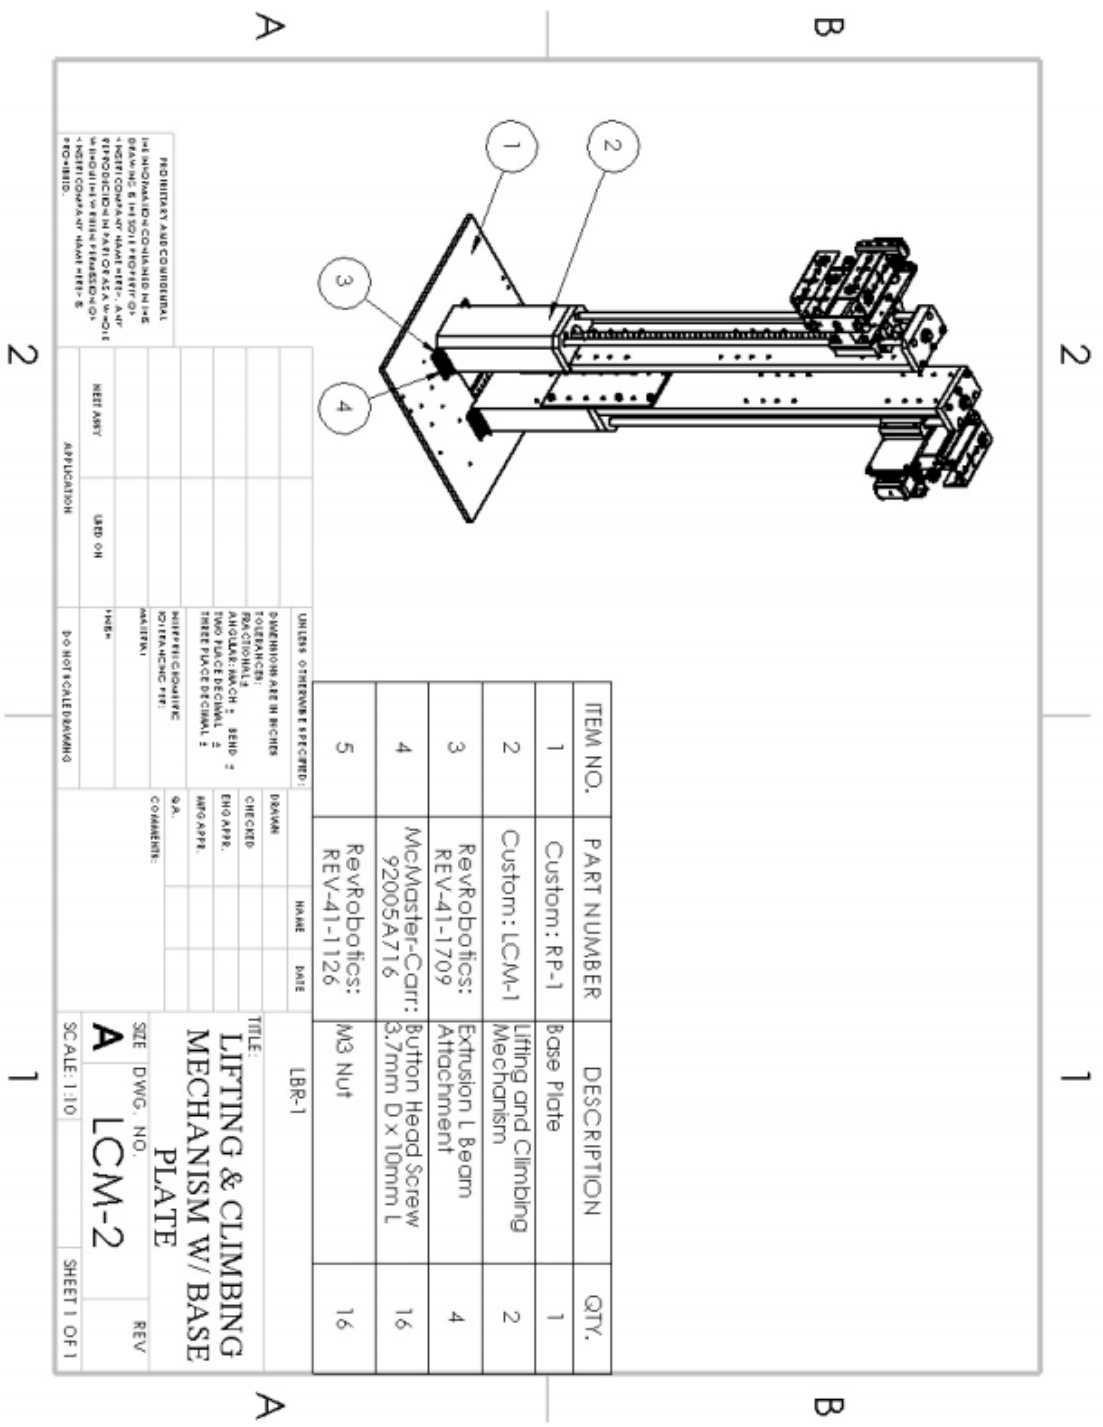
Assembly drawing of the lifting and climbing mechanism on base plate.
